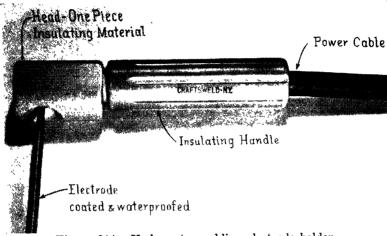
Underwater welding electrode holder (Courtesy of: Craftsweld Equipment Corporation)
